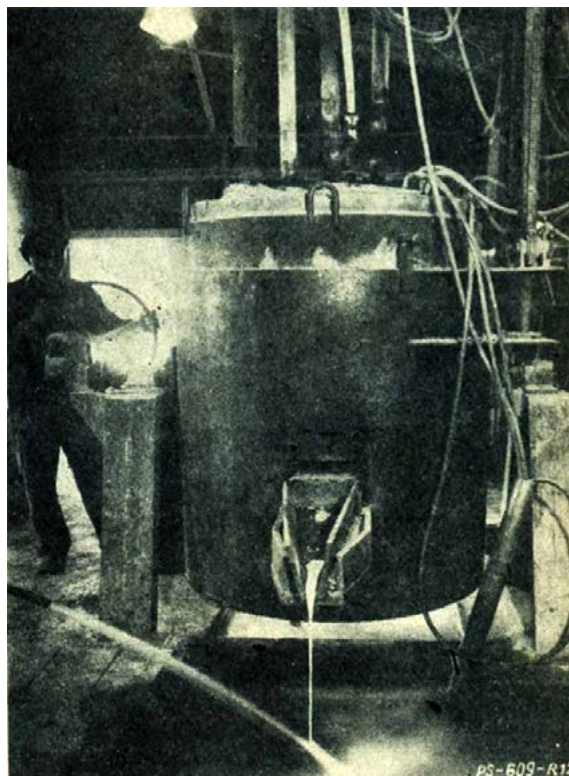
Arc furnace for the production of welding fluxes [27]
